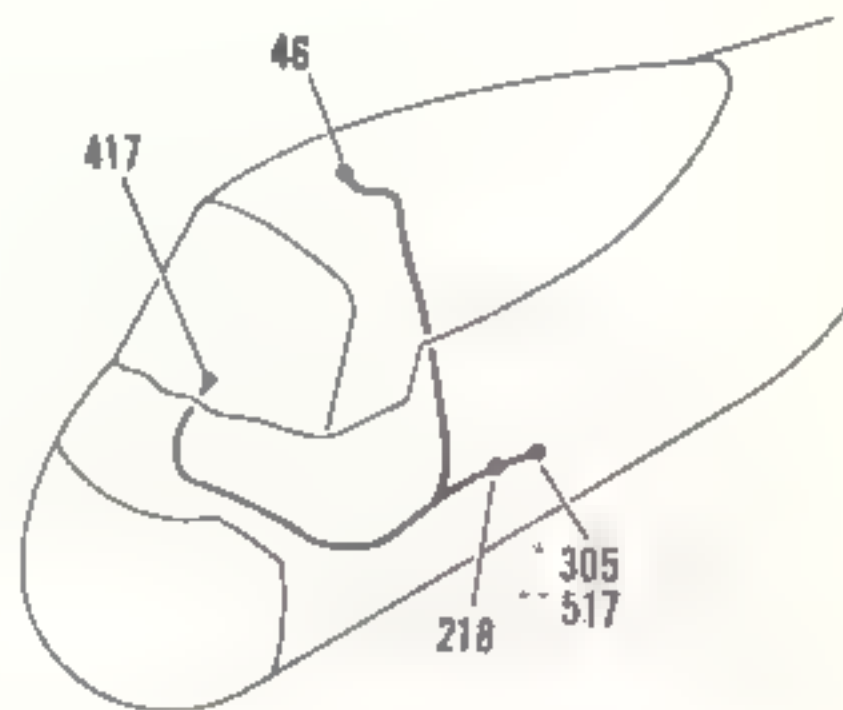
Engine primer and oil dilution (model CH-34A serial No. 54-2862 through 56-4312)
